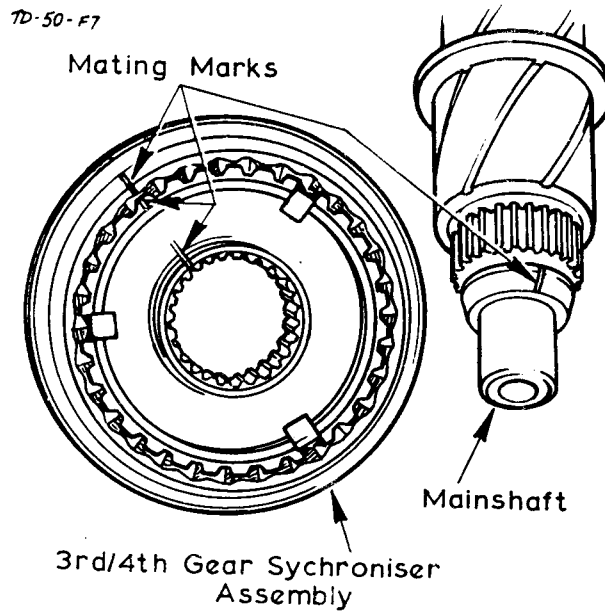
MATING MARKS BETWEEN MAIN-SHAFT AND SYNCHRONISER
